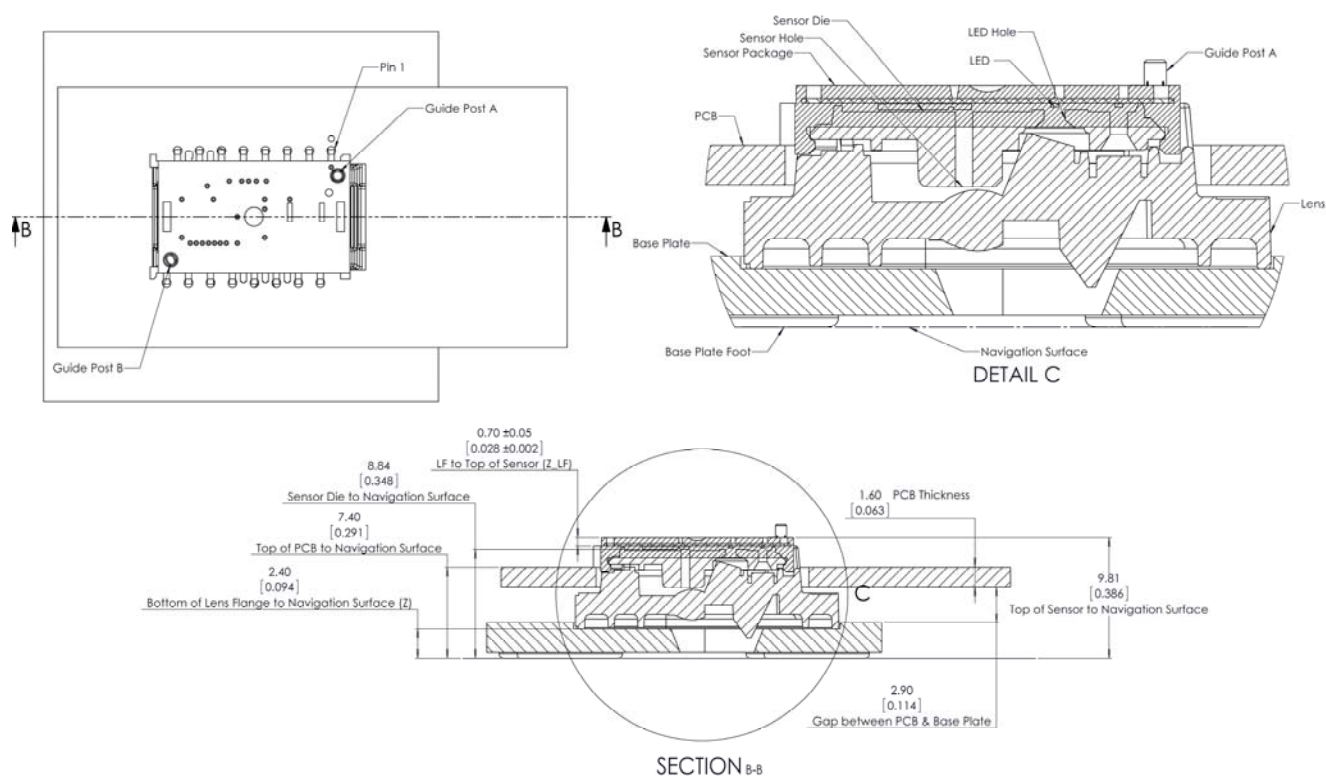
Assembly drawing of PMW3330DM-TZQU and distance from lens reference plane to tracking surface (Z)
